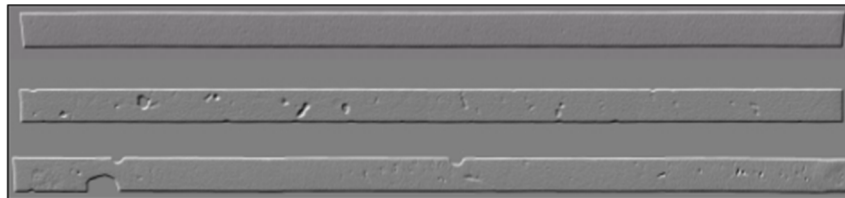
X-Ray Inspection of Solder Test Specimens (Good and Bad Samples)
